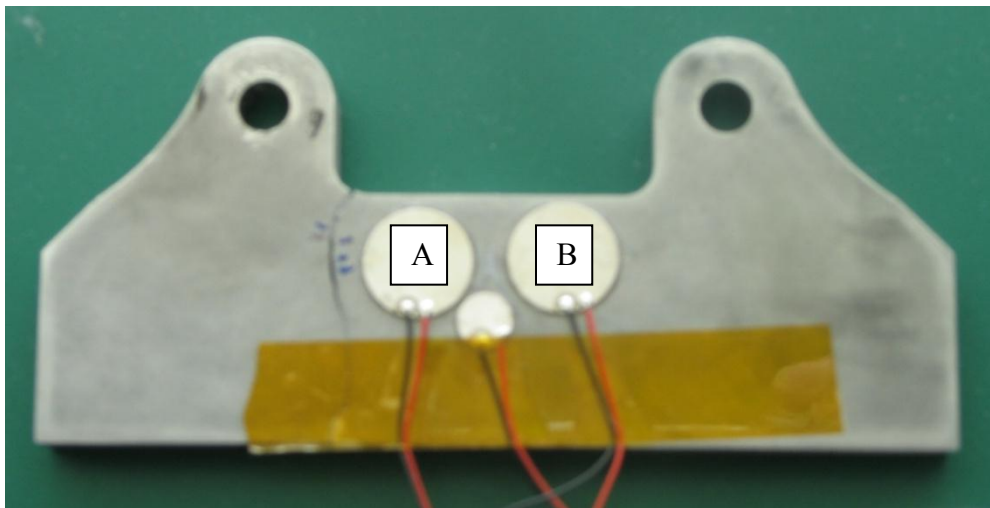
8 Picture of lug joint used in fatigue experiment
